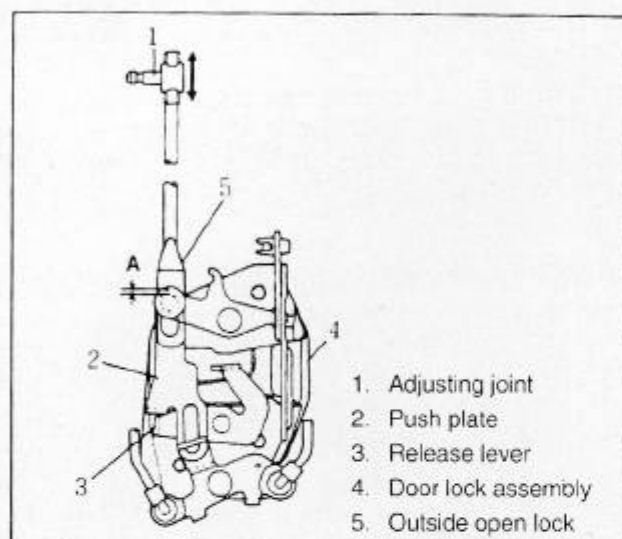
15 ASSEMBLY, INSTALLATION OF ADJUSTING JOINT
